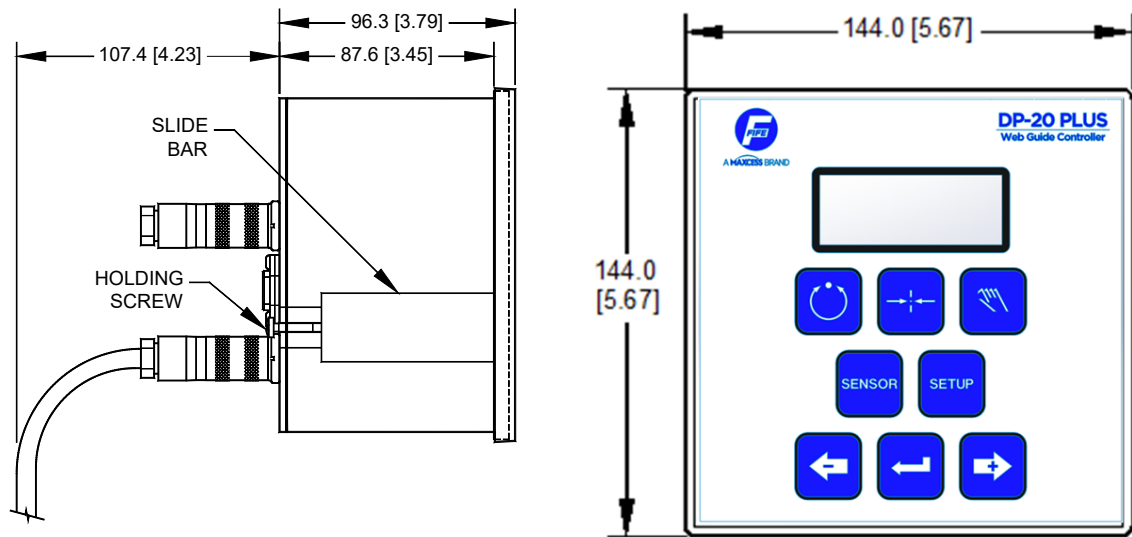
DP-20 PLUS Front and Side Views (Panel Mount shown with 90° connector option)
